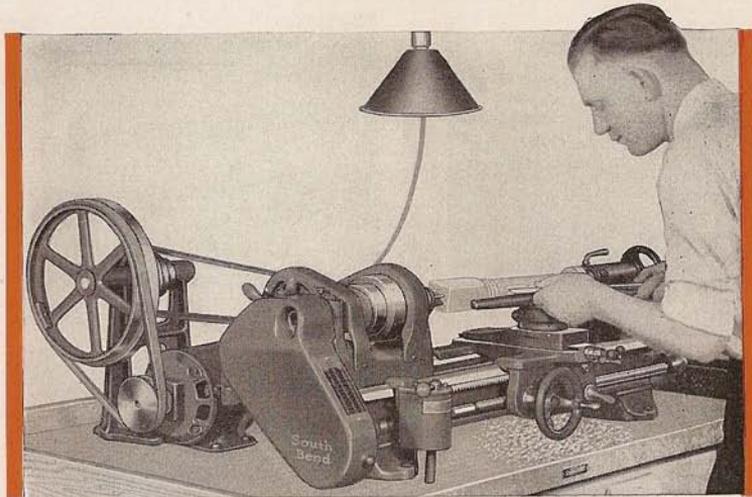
9-inch "Workshop" Lathe Equipped with Two-Step Pulleys on Countershaft and Motor with Belt Arranged for Wood Working.
